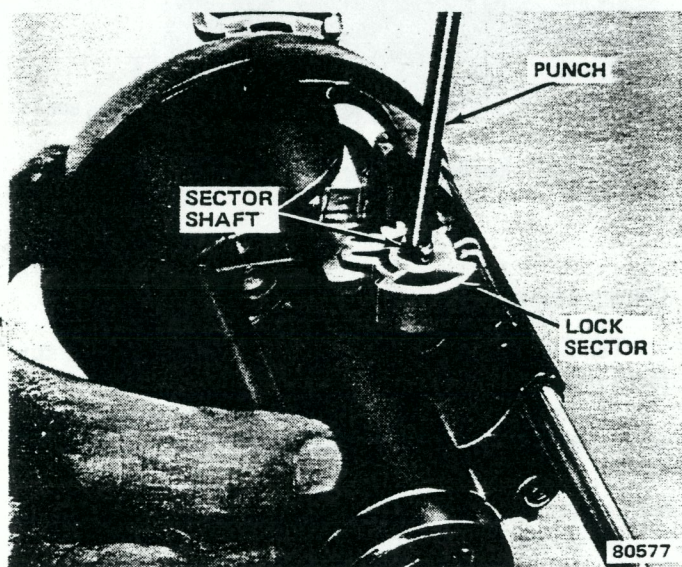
J-56 Lock Sector and Sector Shaft Removal
